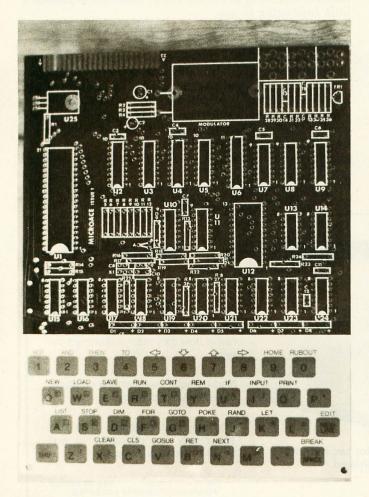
Component side of the main circuit board. Note that component locations are clearly marked, and that the keyboard is an integral part of the printed-circuit board.
